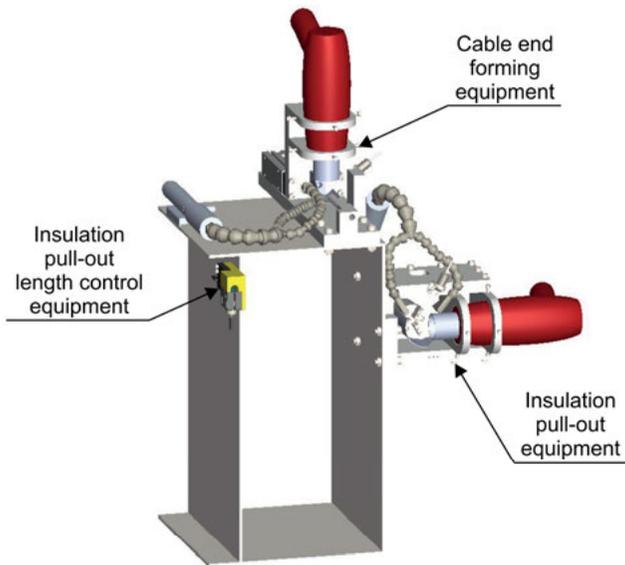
A 3D-CAD model explaining the main components of the constructed cable end preparation prototype equipment.
